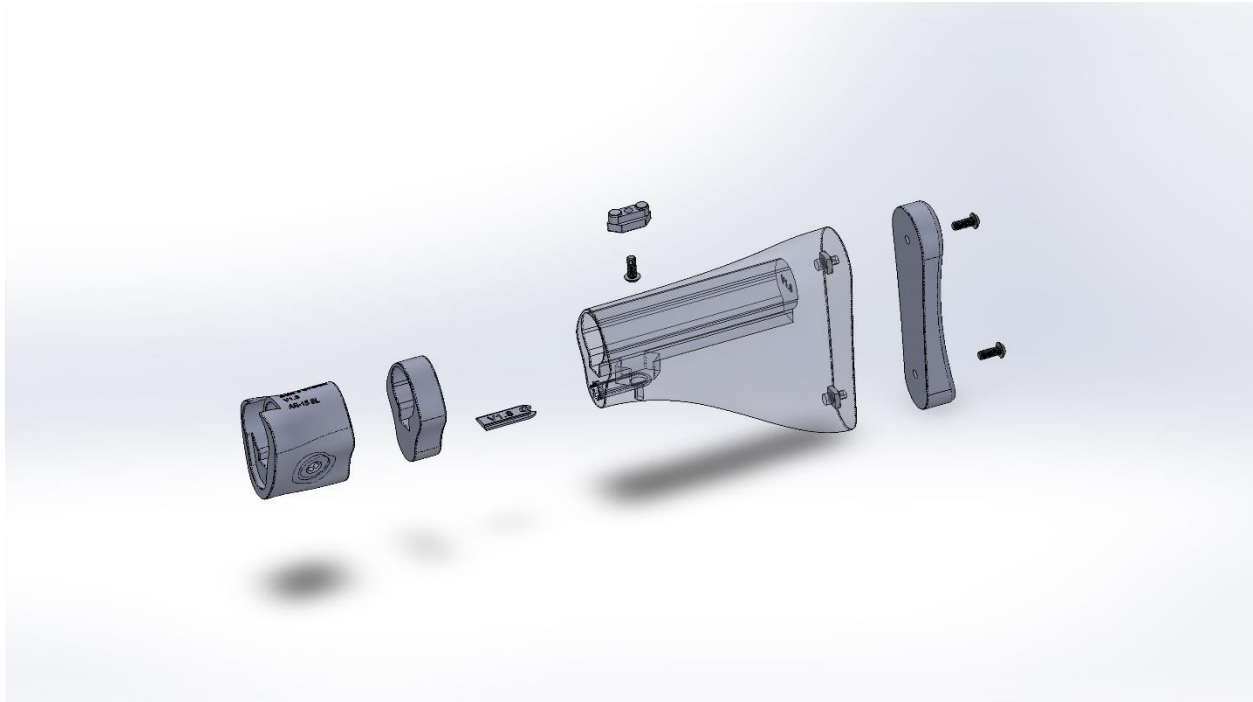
From left to right. Adapter, Neck, Butt, and Pad. Small parts are the retention assembly.
